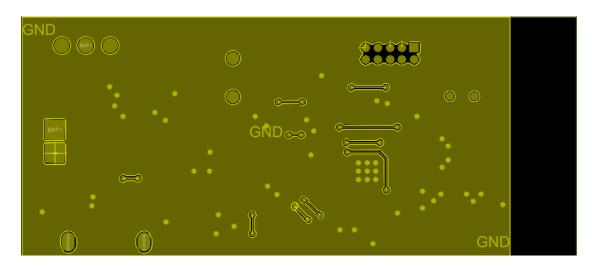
Safe Light PCB Silk Etch BOTTOM view
